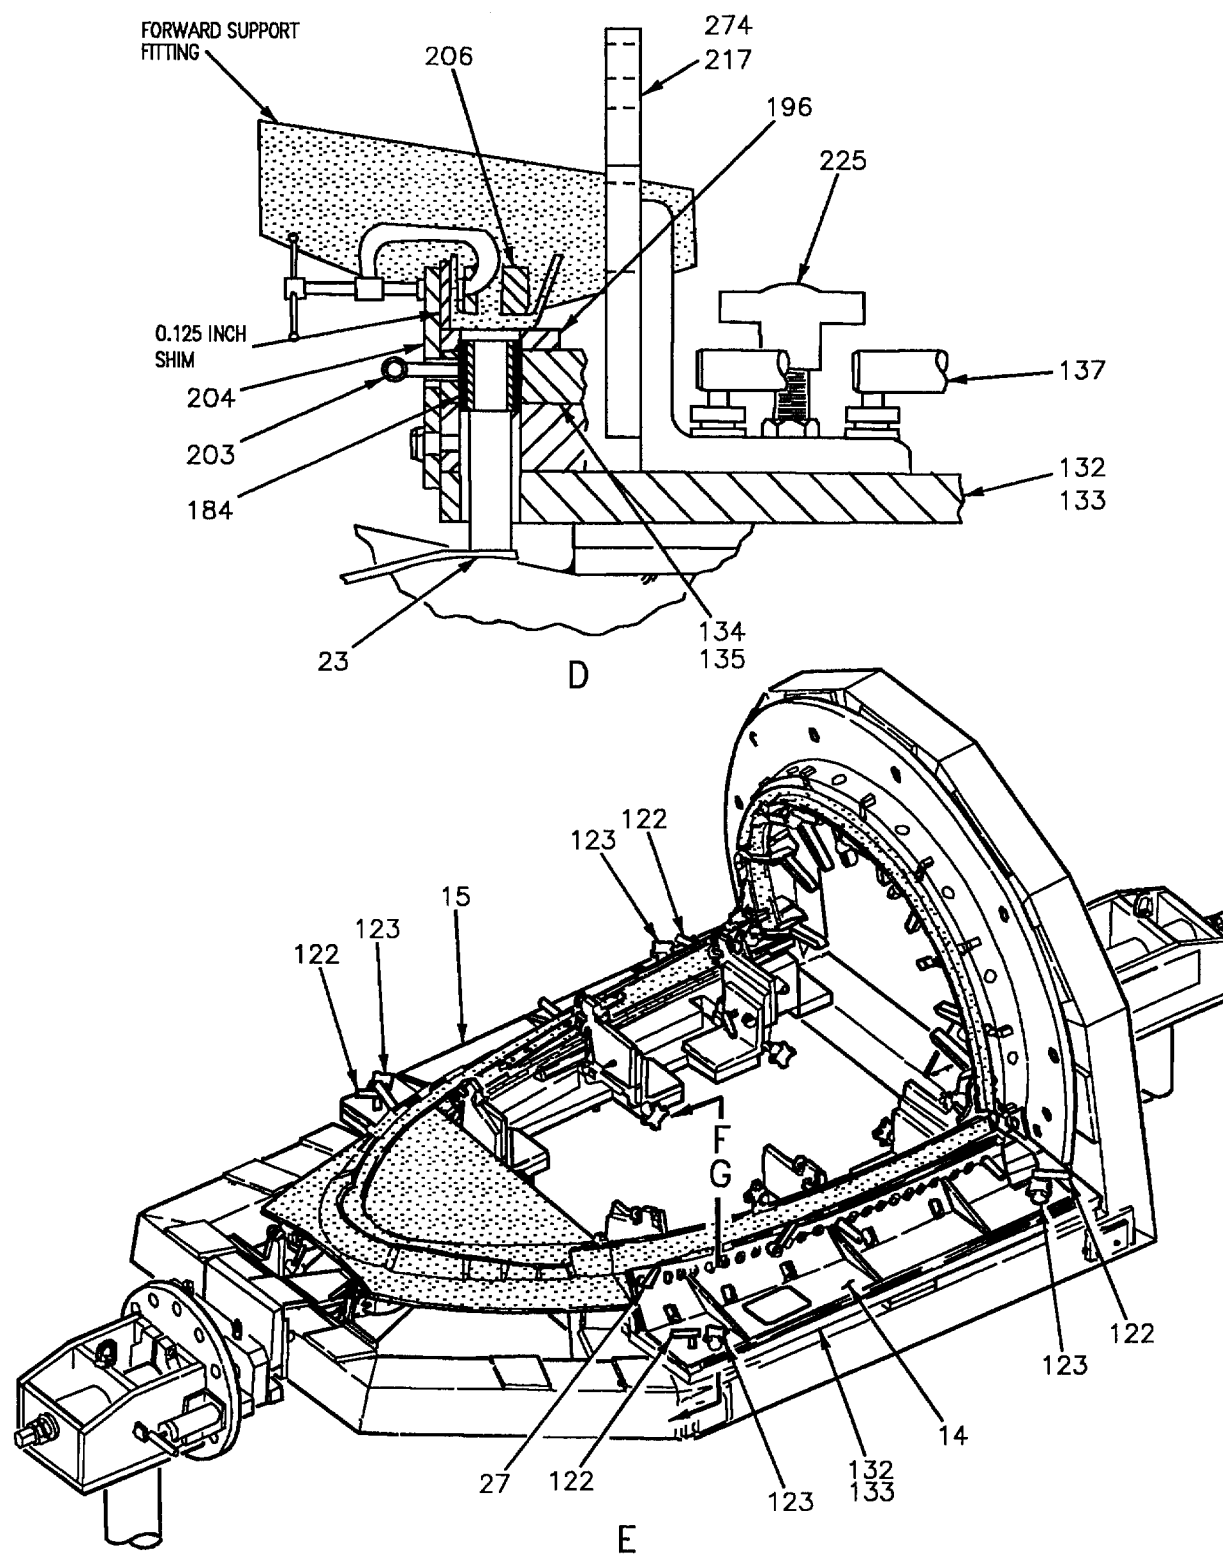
Inspection or Replacement - Forward Support Fitting (Sheet 3)
